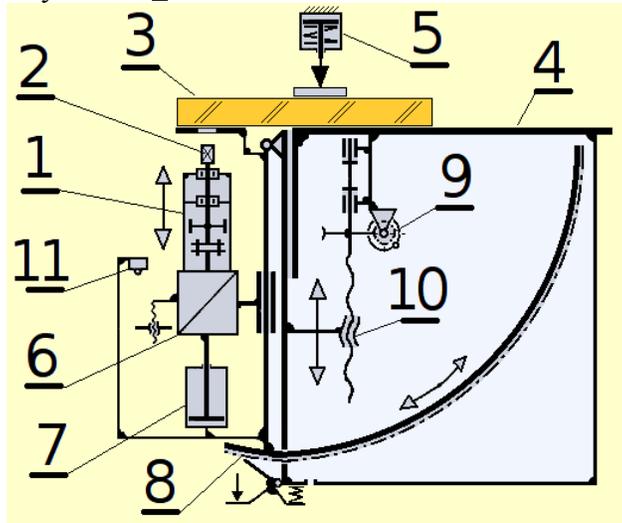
Scheme of the multispindel drilling machine DCWGW 19: 1 - working unit, 2 - drill, 3 - work piece, 4 - working table, 5 - pneumatic cylinders for clamping, 6 - electrical motor, 7 - working unit feed pneumatic cylinder, 8 - latch mechanism, 9 - snail gear box, 10 - screw mechanism, 11 - end switch
